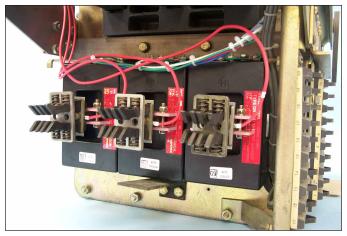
PT Wires Secured to the Breaker and Sensor Harness.
